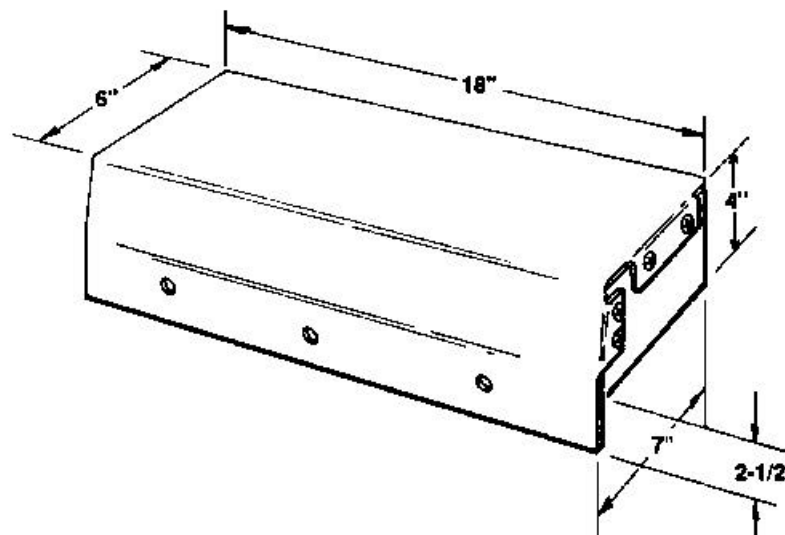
Overall dimensions of the Excell Bus-Door Operating Mechanism.
